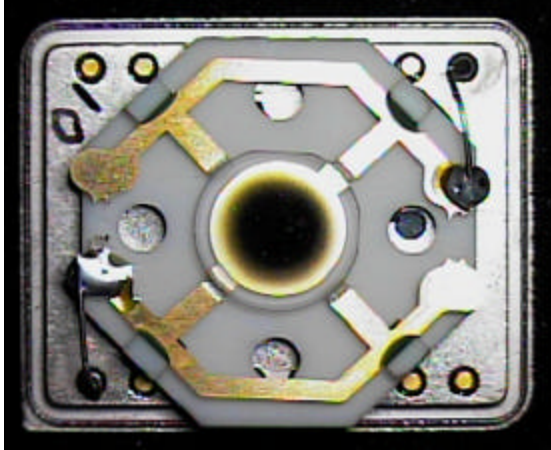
(8mm) Resistance Weld QSM Structure (flats).
